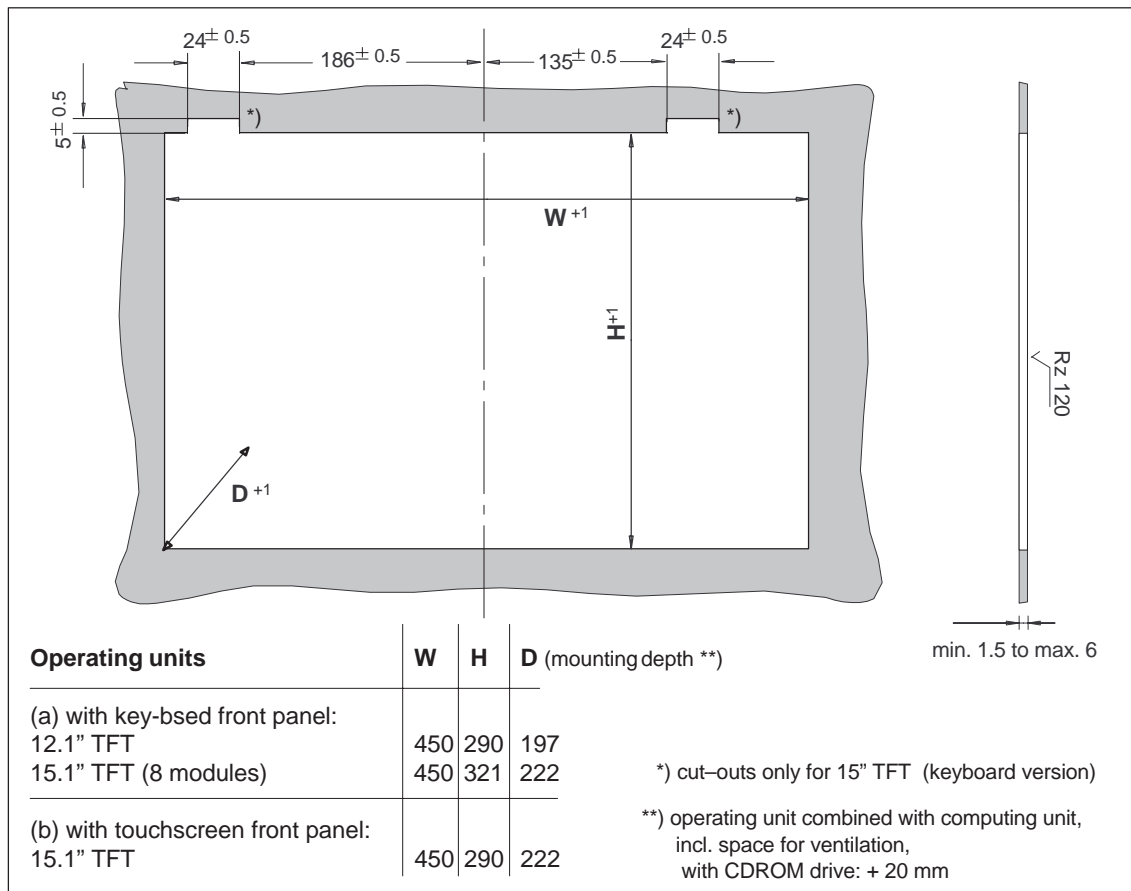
Mounting cut-out for standard mounting of Panel PC 870 (width x height x depth in mm)
